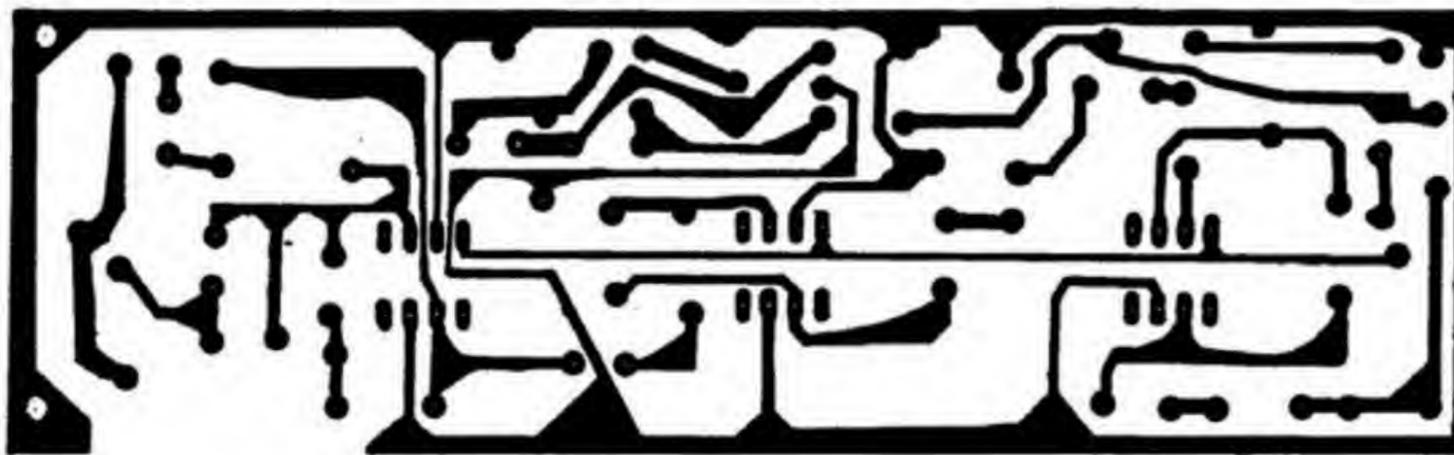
Actual-size PCB layout of Figs 4, 5, 6.
